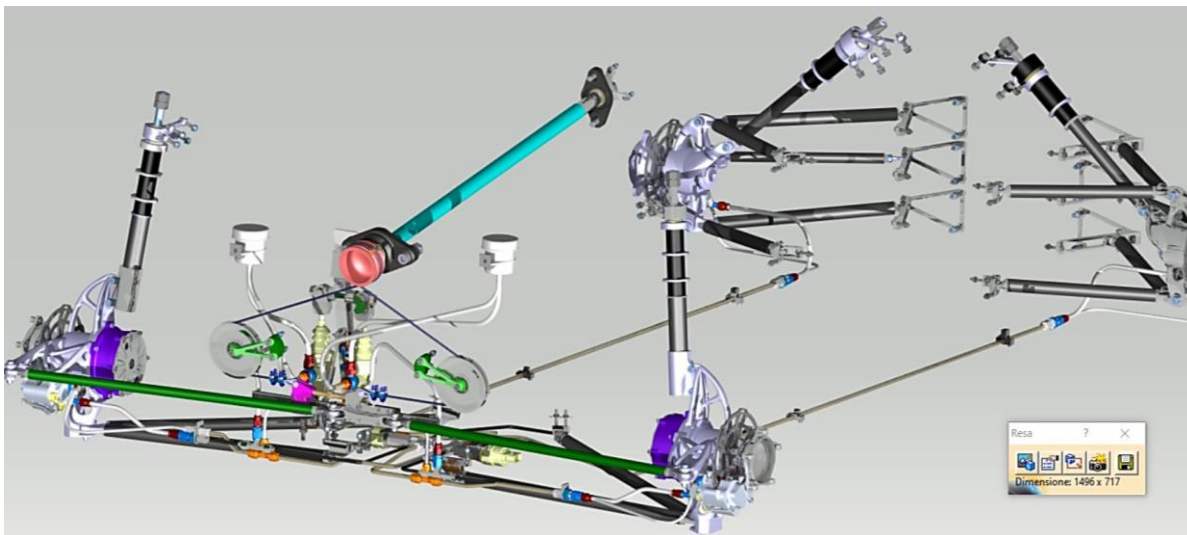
Assembly of all mechanical systems of muc022 (Final CAD Drawing, CATIA V5, TUfast E.T. 2022)
